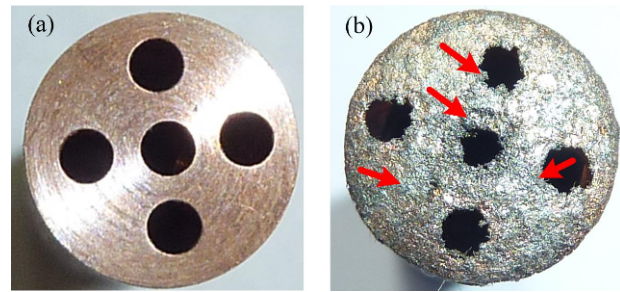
Photographs of the electrode (a) before machining; (b) after machining.
